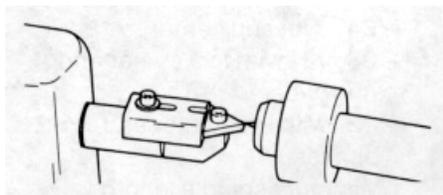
Align the top edge of the cutter with the tip of the lathe cup center.
